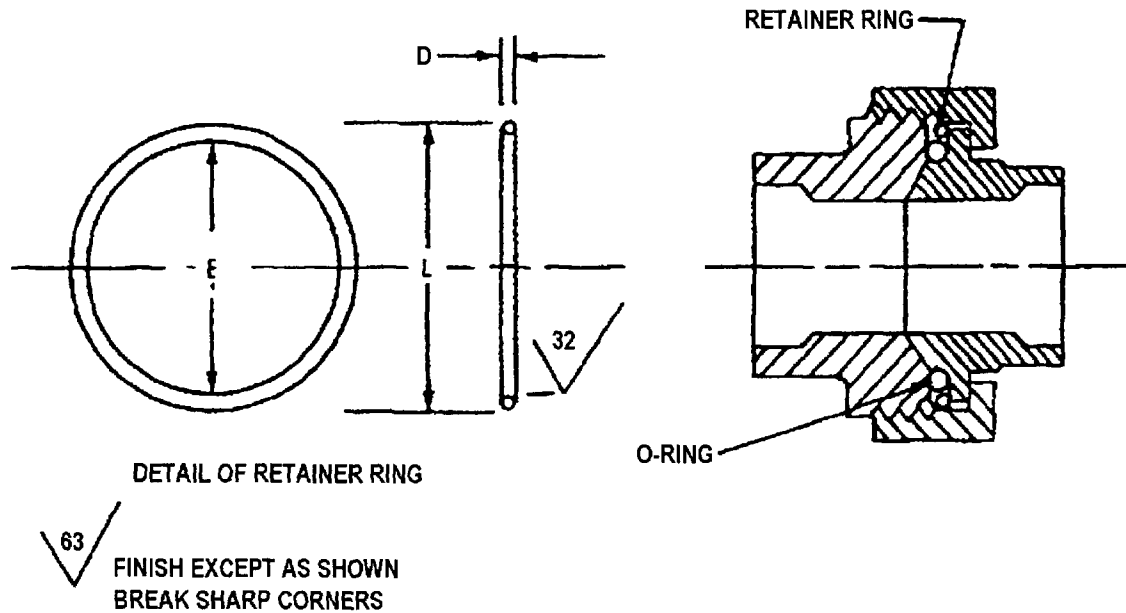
Unions with Retainer Ring and O-Ring
